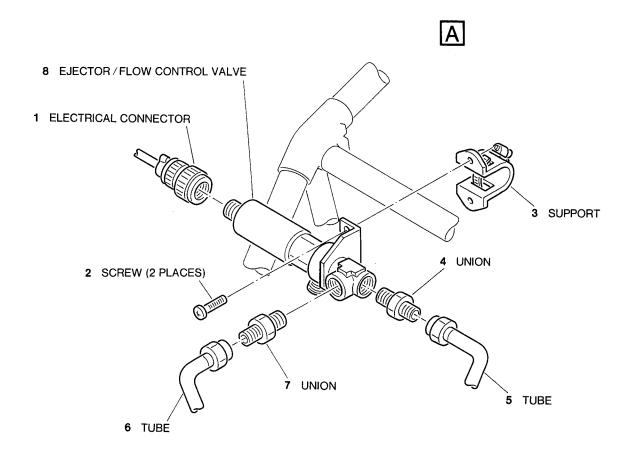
Ejector/Flow Control Valve - Removal/Installation
